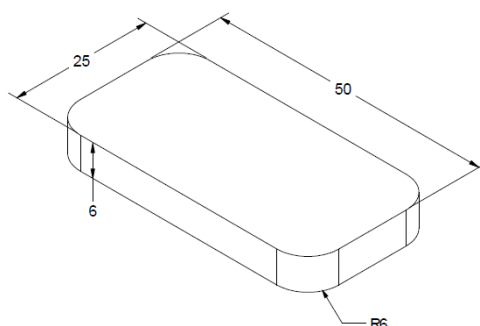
CAD drawing which indicates the outline and dimensions of the *DM 20* DMLS samples
